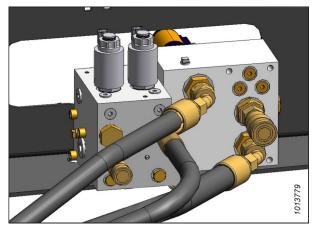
M150/M155/M155*E4* without Reverser Valve
